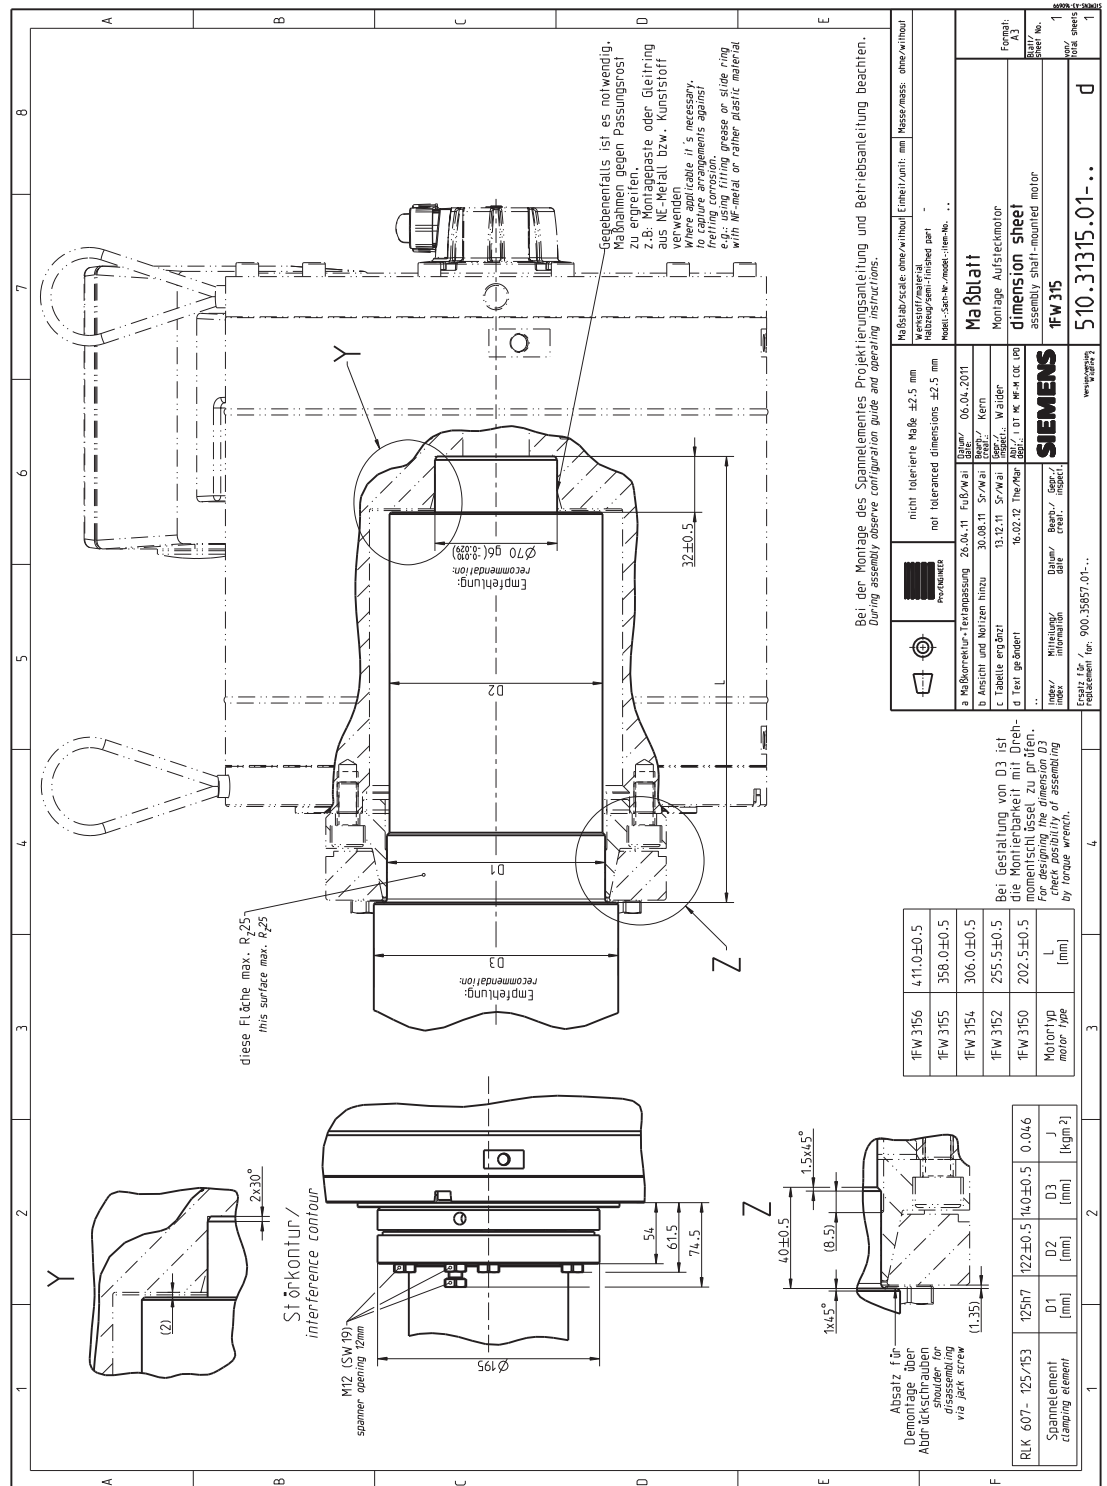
Dimension drawing, mounting plug-on motor 1FW315
